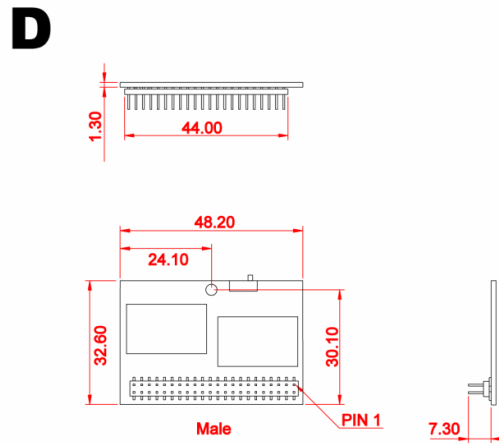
Mechanical Dimension of EDC4000 44-pin (Horizontal Female/Male Type E)
